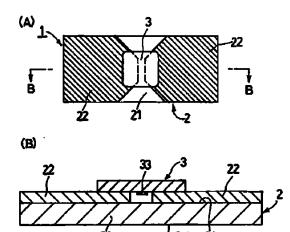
It is a vertical section side elevation in the phase which passed through slit processing and cutting of this long sheet.
